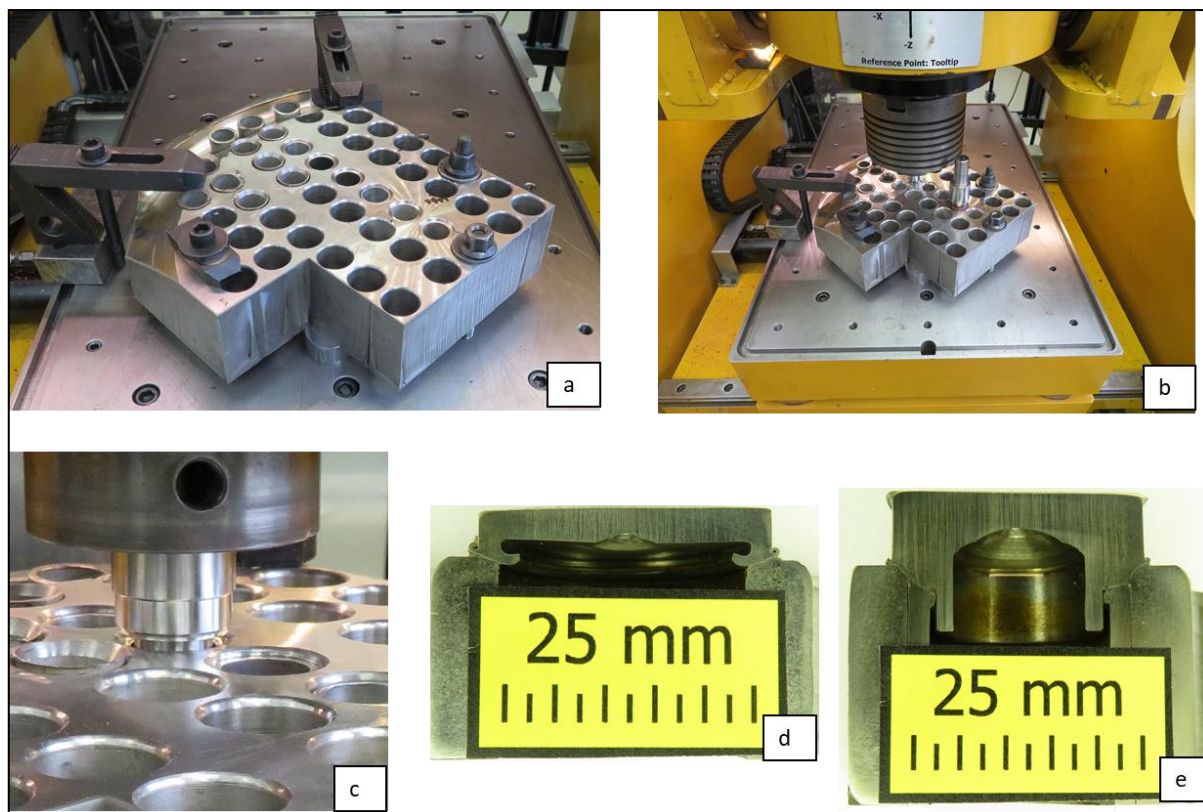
Tube-to-tube sheet weld setup in laboratory environment
